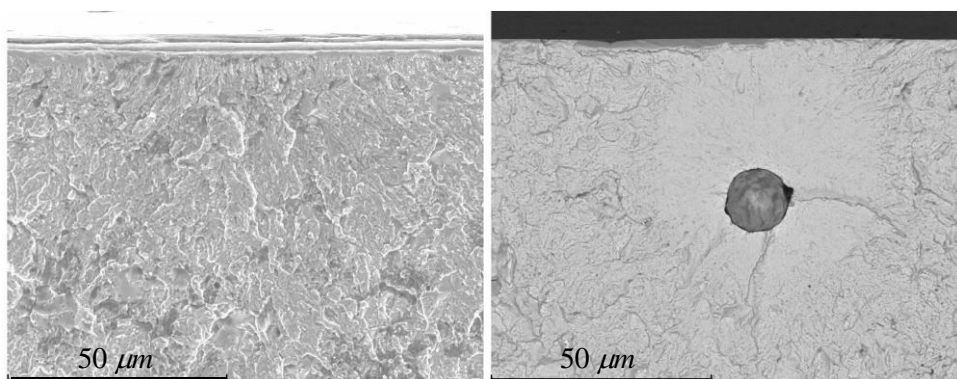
Fatigue failure of 4-point bending test specimen, SUJ2 HRC58- 62
